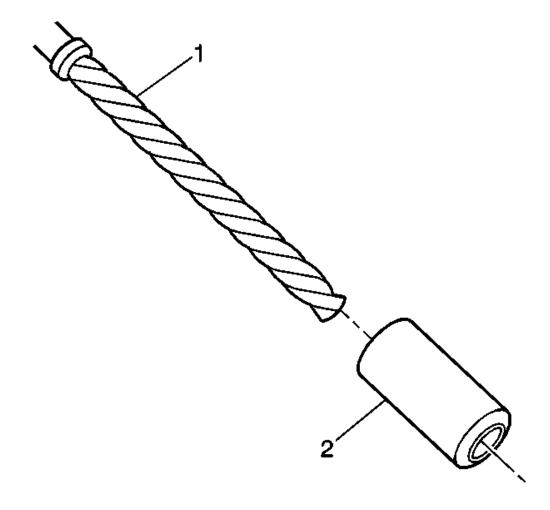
Stop Collar And Counterbore Drill Courtesy of GENERAL MOTORS COMPANY
